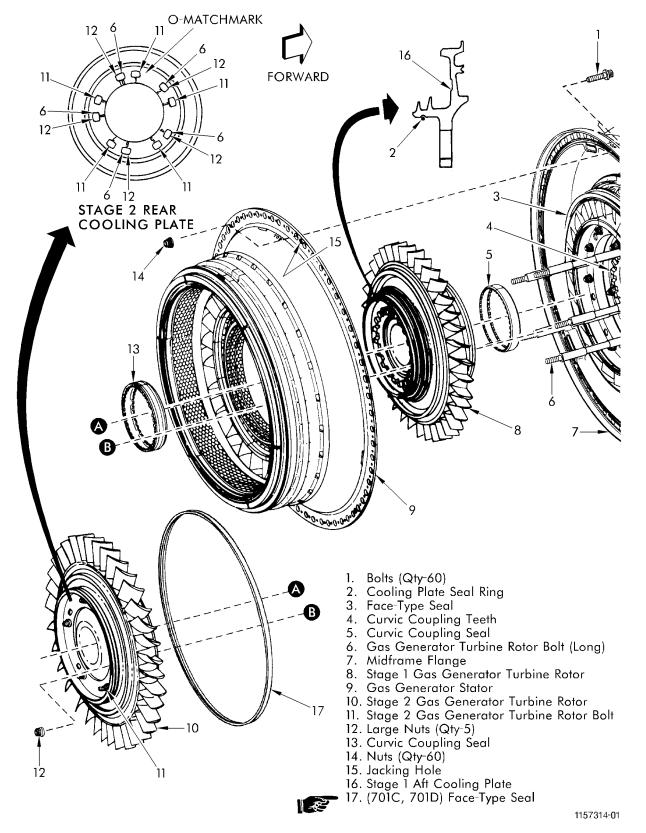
(T701, T701C, T701D) Stages 1 and 2 Gas Generator Turbine Rotor and Gas Generator Stator and Face-Type Seal; Removal and Installation
